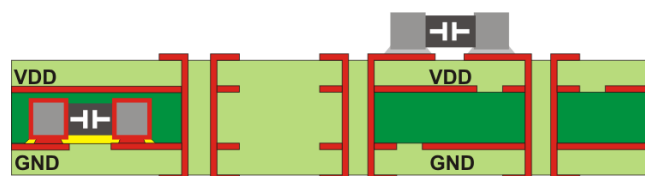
Comparison of a surface-mounted decoupling capacitor (right) to a decoupling capacitor integrated using the Embedded Component Packaging technology from AT&S (left)
